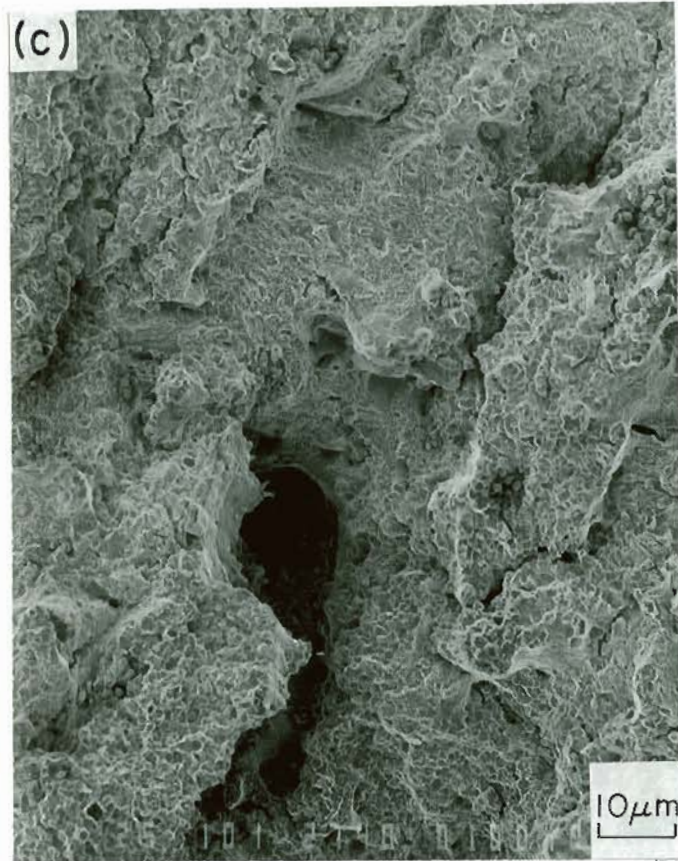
High magnification fractographs showing complete transgranular fracture in region B.
